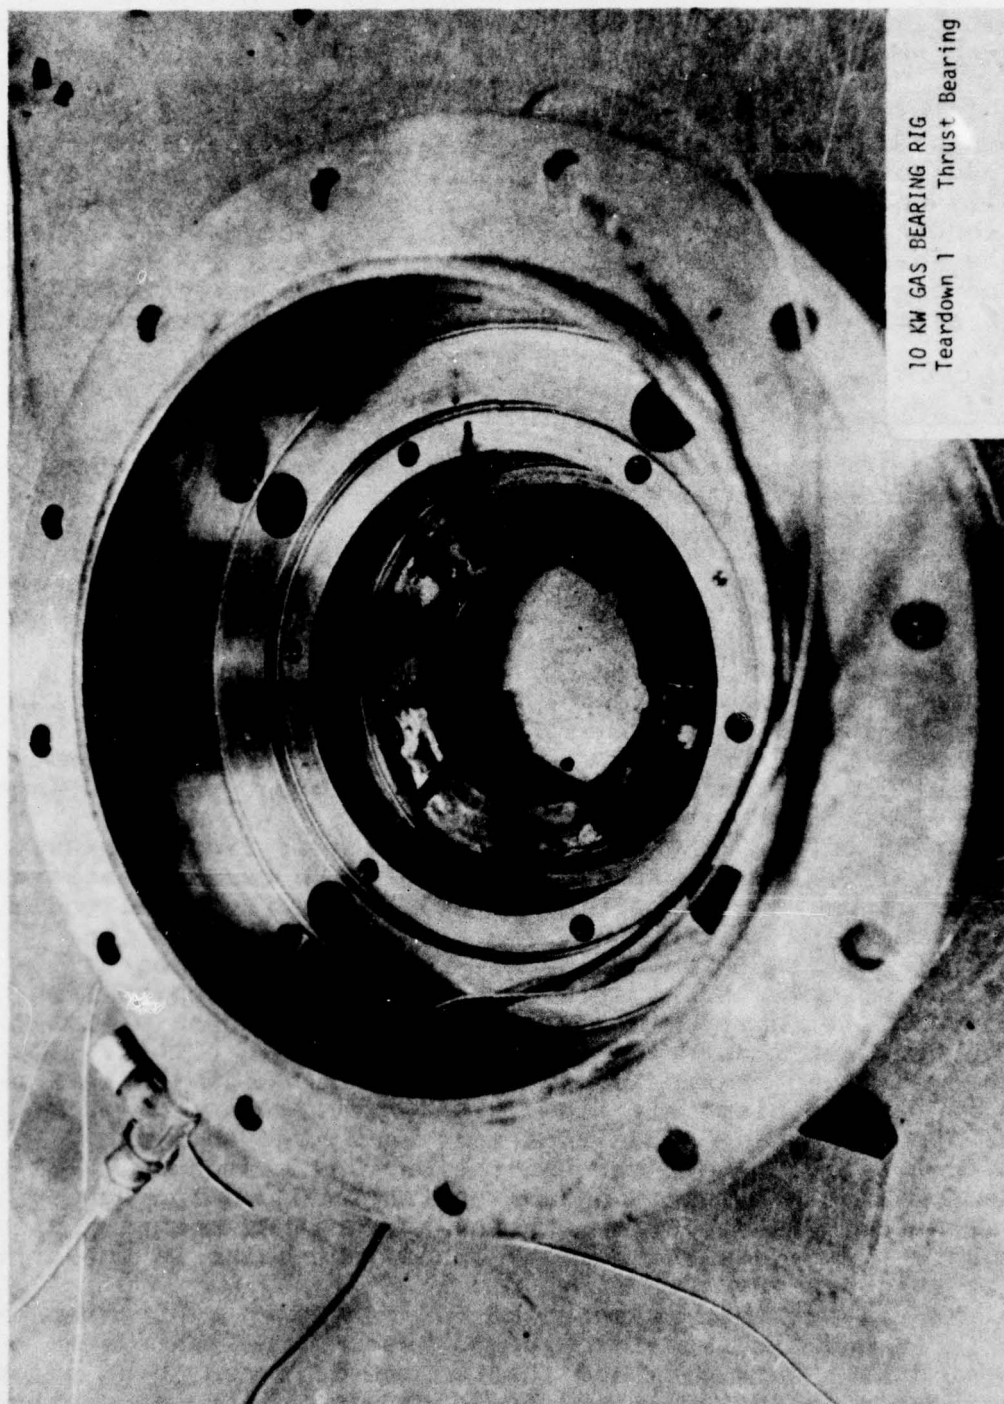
10 KW Gas Bearing Rig - Teardown 1, Thrust Bearing Failure, Aft Bearing
